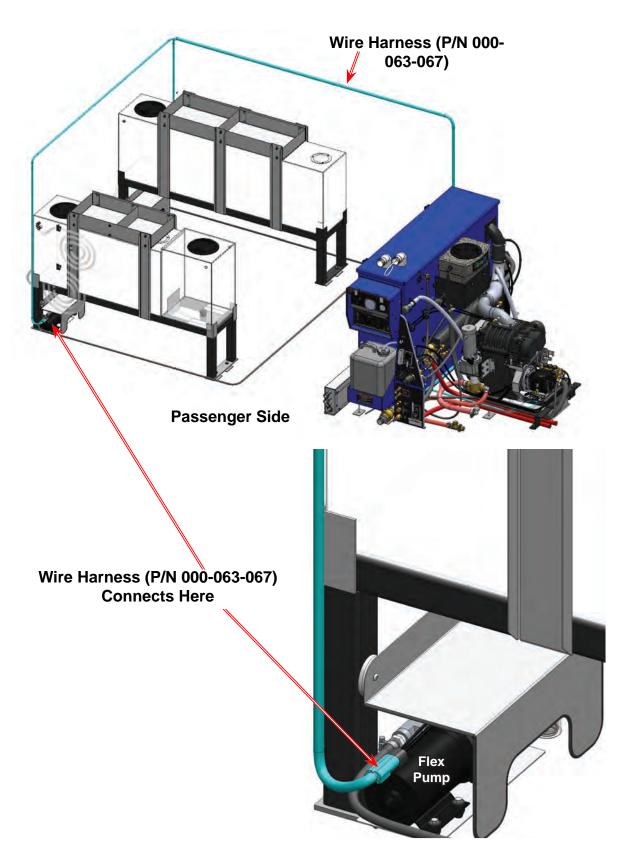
Route and Connect Flex Wire Harness to Passenger Side Pump
